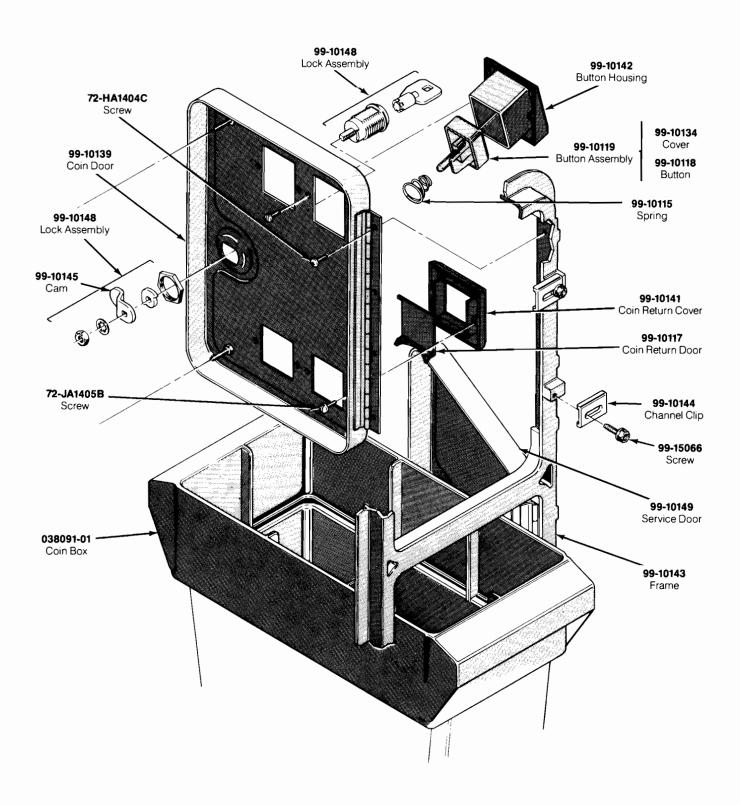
Coin Acceptors, Inc. Coin Door Assembly, continued 171027-001 A
